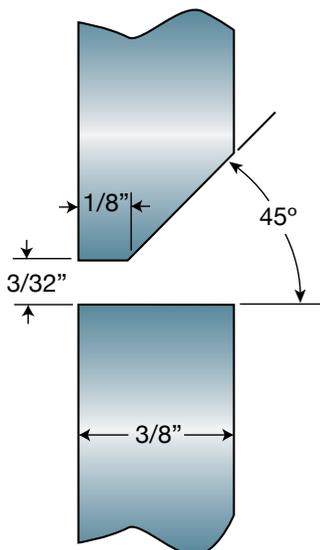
V-Groove Joint in the Horizontal Position
